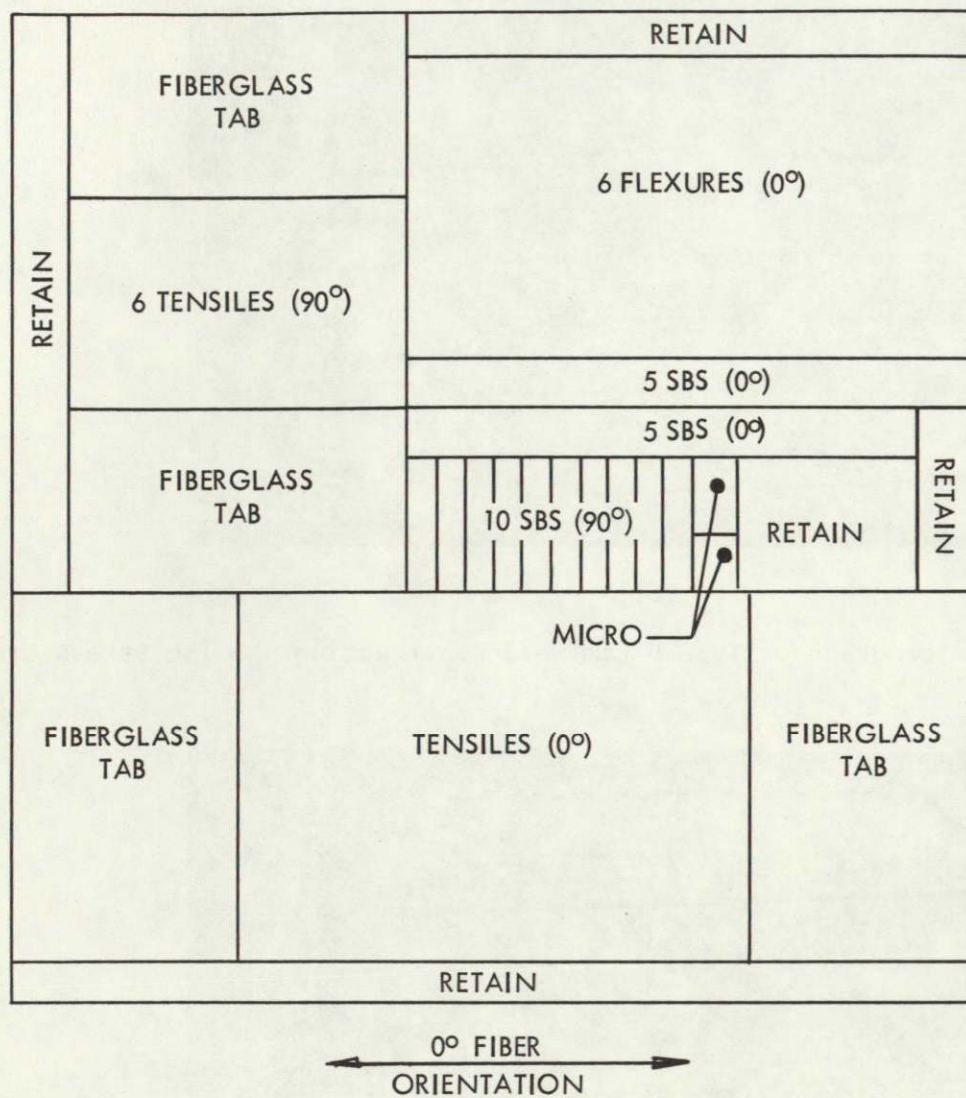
TEST SPECIMEN LAYOUT FOR LAMINATE VI.
